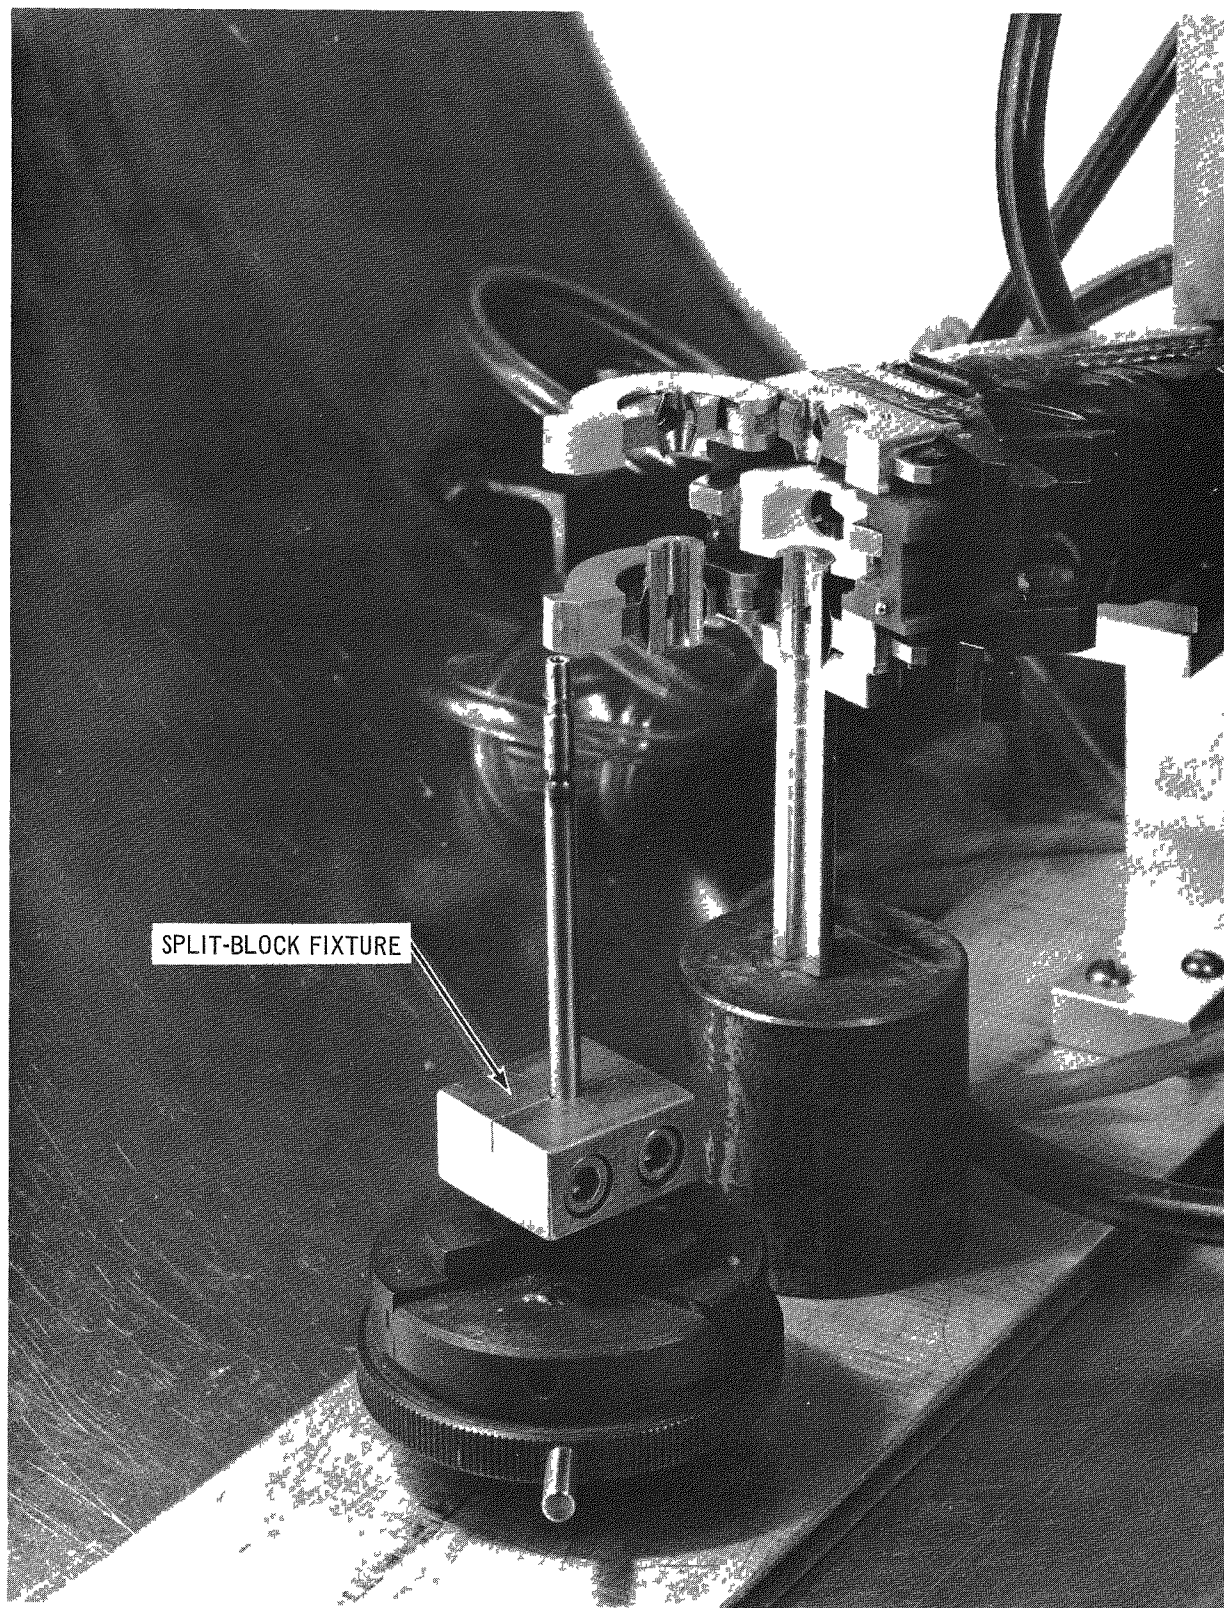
Element Preassembly after Filler Pin Has Been Removed and Tubular Gauging Fixture Replaced with Split-block Fixture. ANL Neg. No. 104-77-106.
